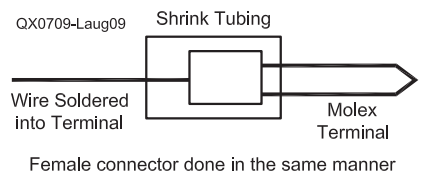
I soldered the connecting wire to a Molex terminal, then used a piece of heat-shrink tubing to cover the connection. The mating female Molex terminal is wired the same way.
